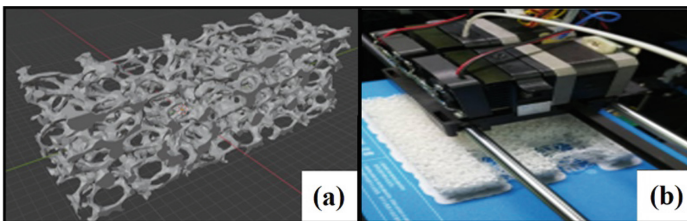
(a) CAD drawing and (b) printing process (stereolithography).
